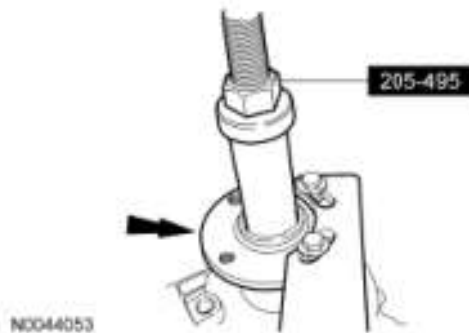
Installing Flange Using Transmission Output Shaft Flange Installer
